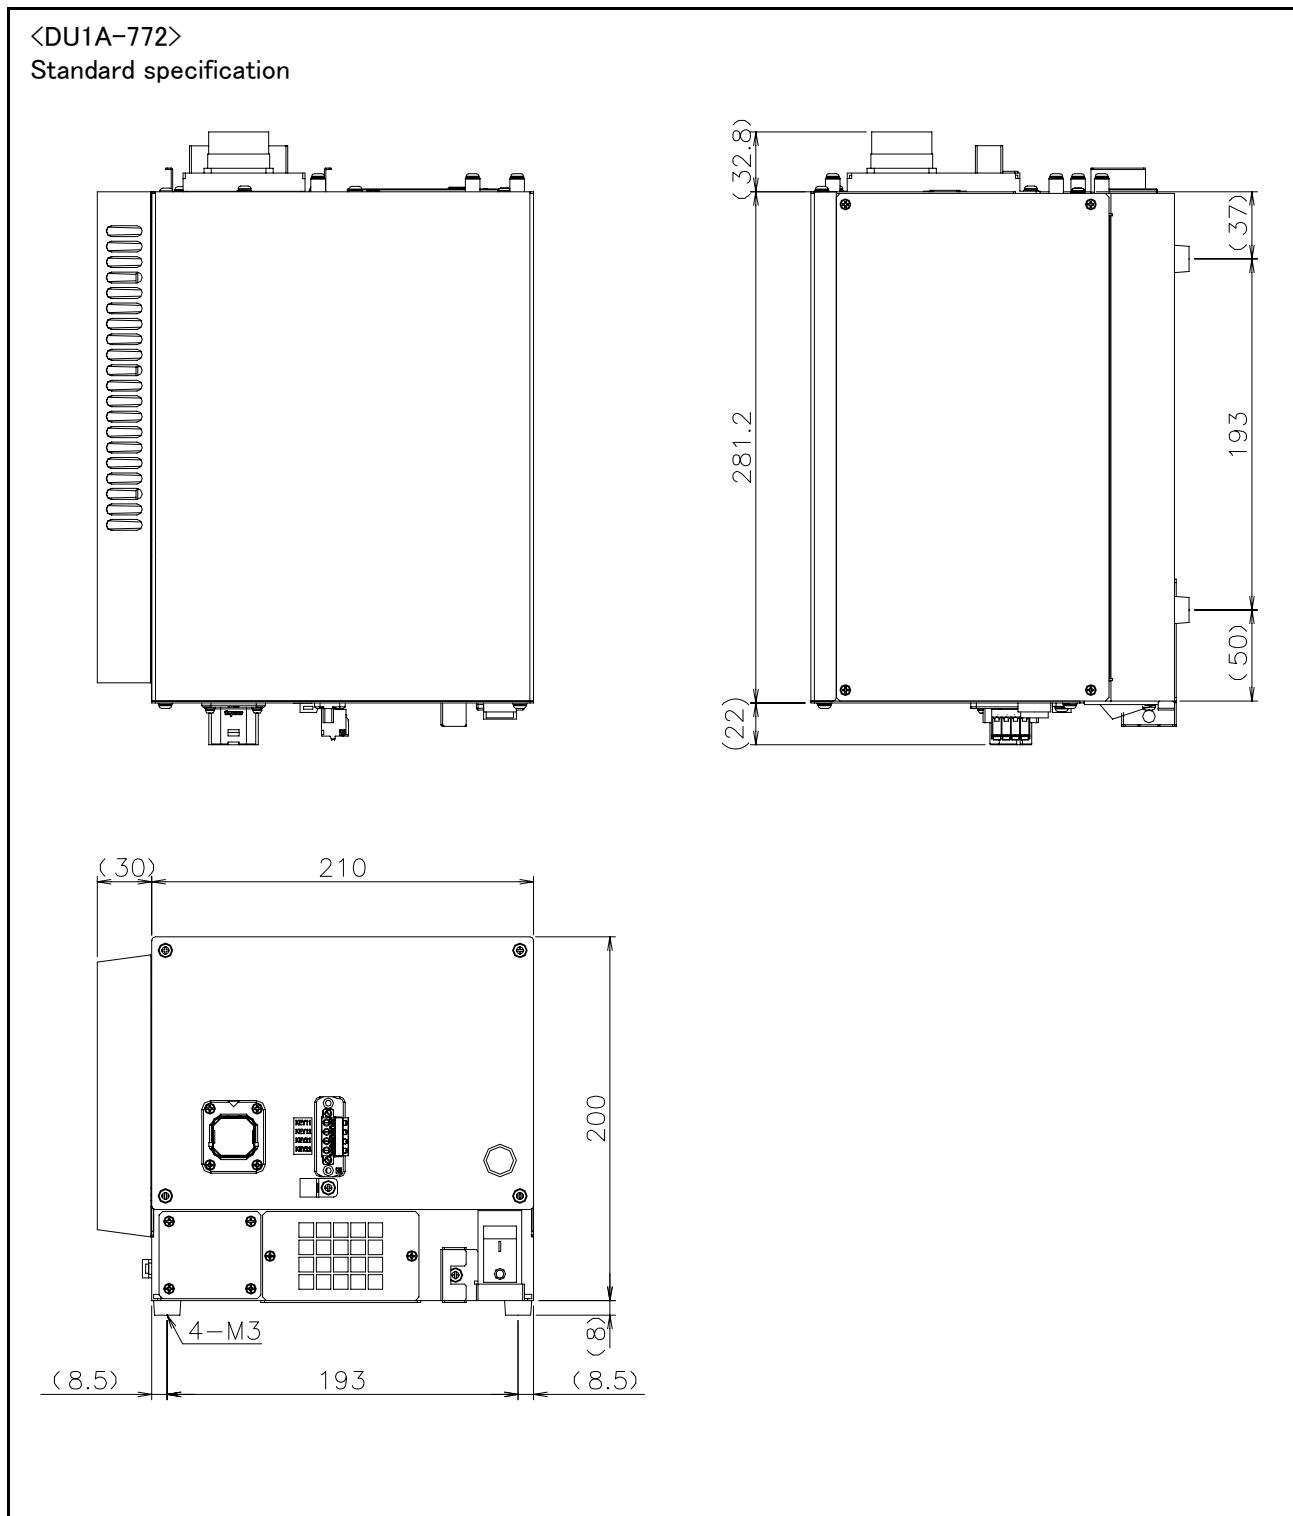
Outside dimensions of controller (DU1A-772)
